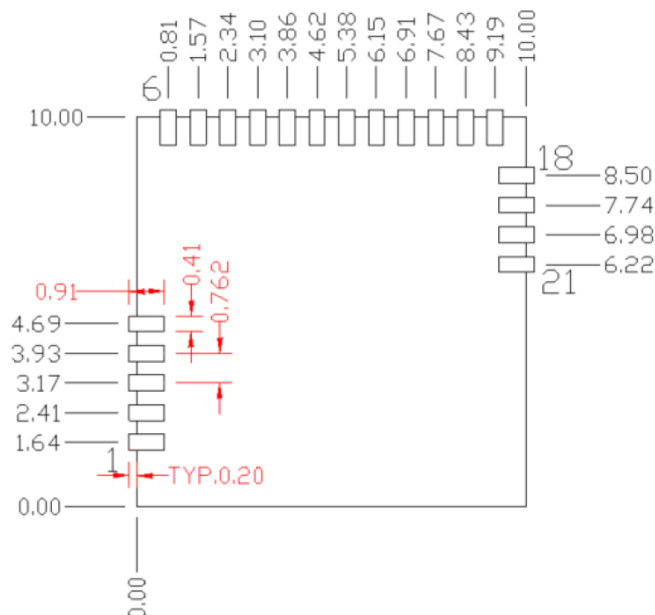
Host Board Required PCB Layout Pattern To Pad Center Relative to Origin
